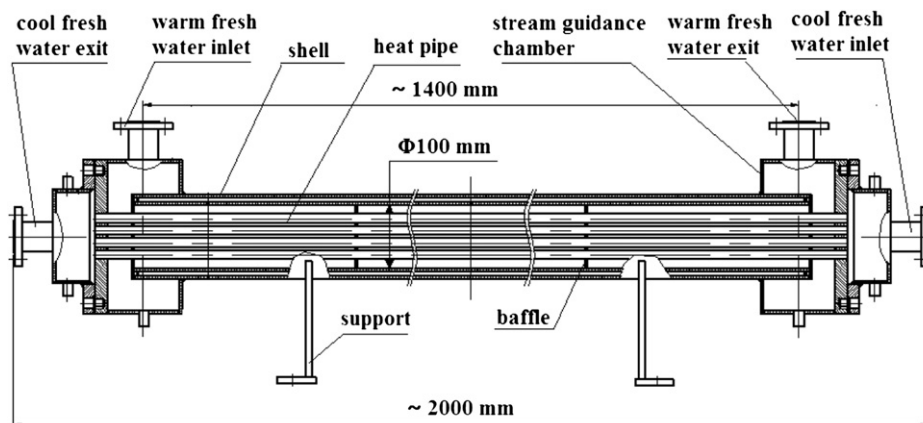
Assembly drawing of the test sample of THB-STHX.
